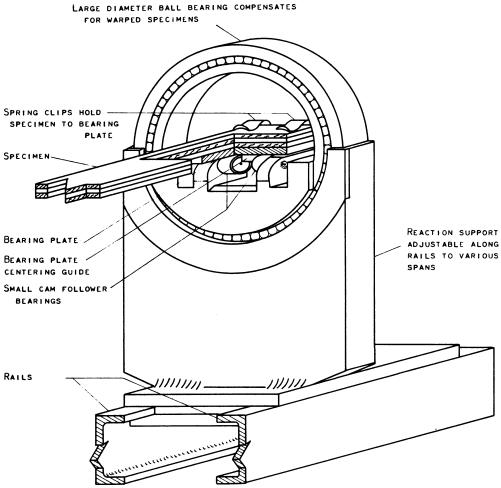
Reaction Bearing for Small Flexure Test Specimens
